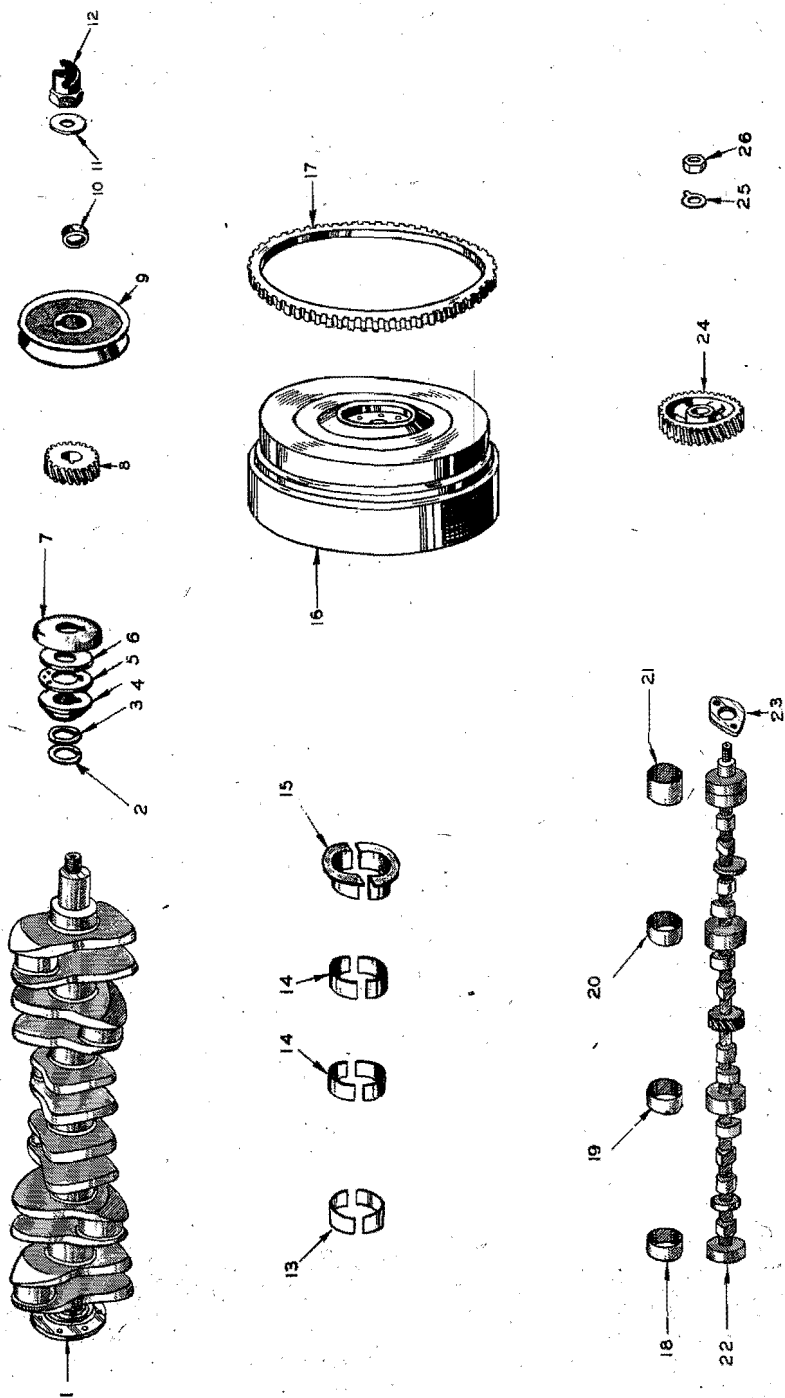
CRANKSHAFT AND CAMSHAFT GROUP
